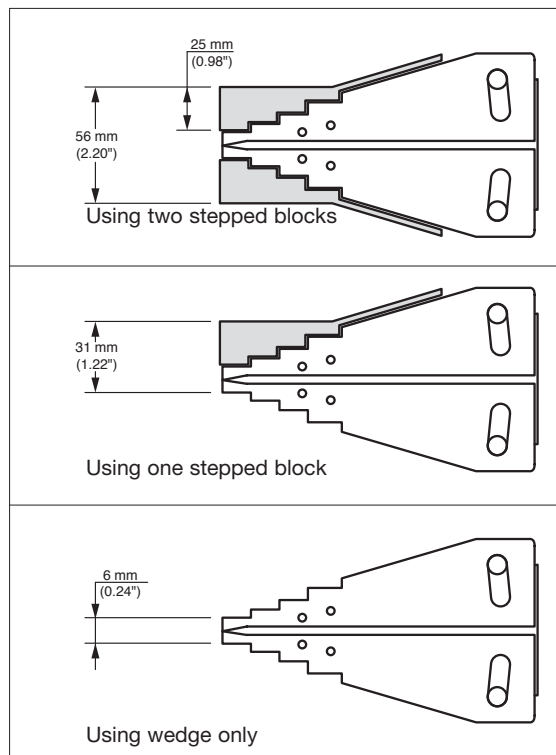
B Wedge head dimensions while using the FSB-1 stepped block(s).(cont)
